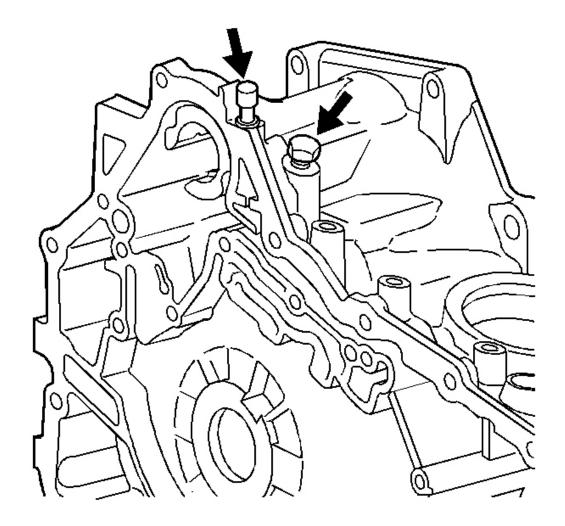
View Of Vent Assembly & Oil Pressure Test Hole Plug Courtesy of GENERAL MOTORS CORP.
